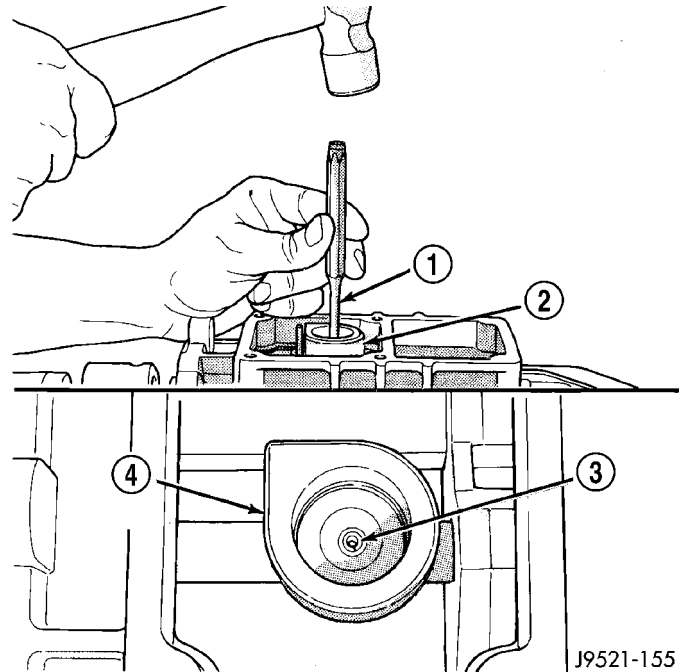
SEATING SHIFT SOCKET ROLL PIN
